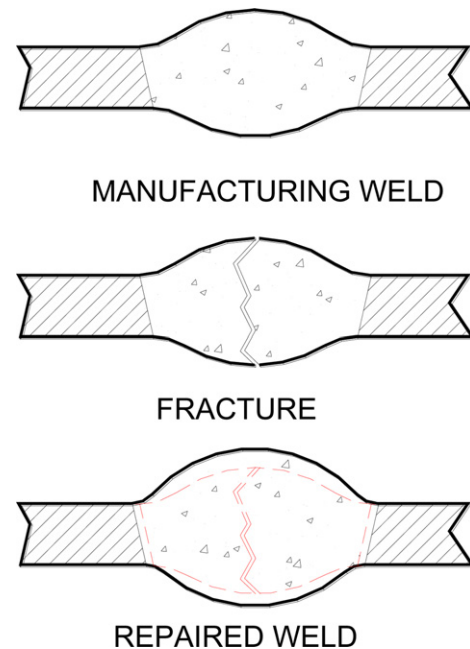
Repair welding procedure by overlapping the previous weld bead.
